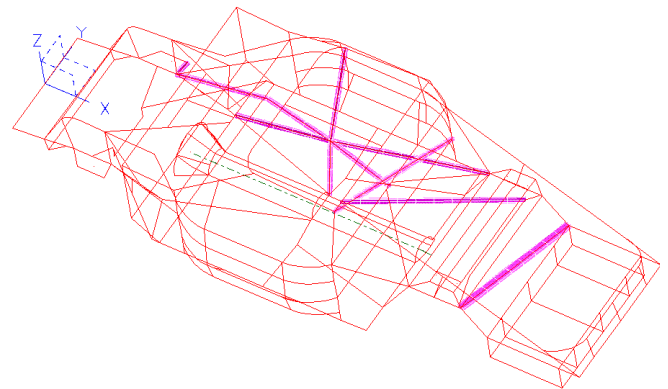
Asymmetry in the Baseline Hopkins Chassis (Isometric view from rear showing chassis coordinate system at front end)
